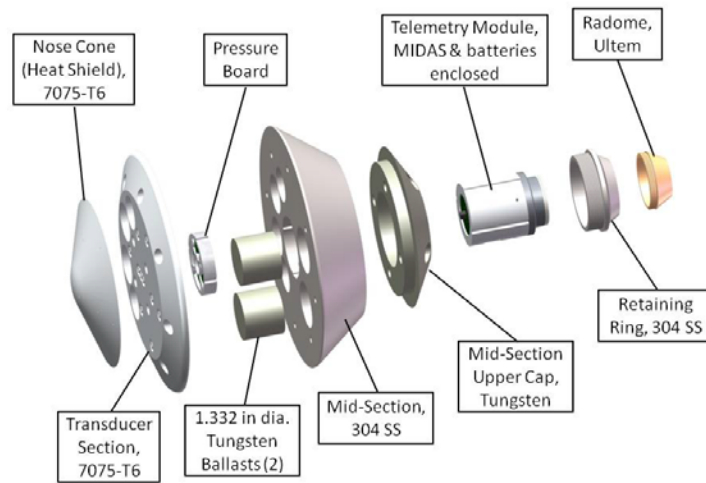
MSL-PTM CAD model assembly shown in exploded view.
